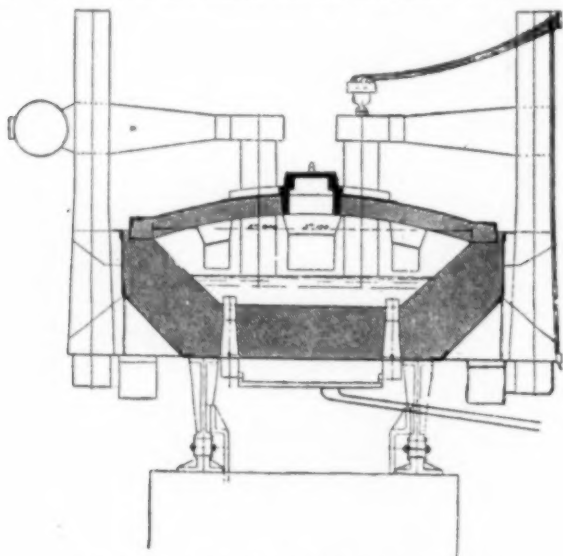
VERTICAL SECTION OF GIROD FURNACE.
